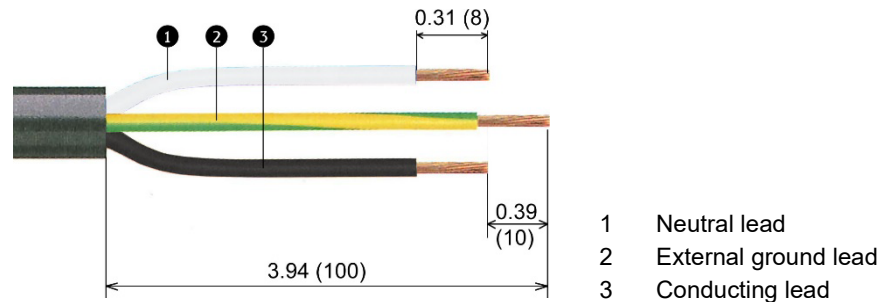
Removing the insulation: Dimensions in inch and (mm)
